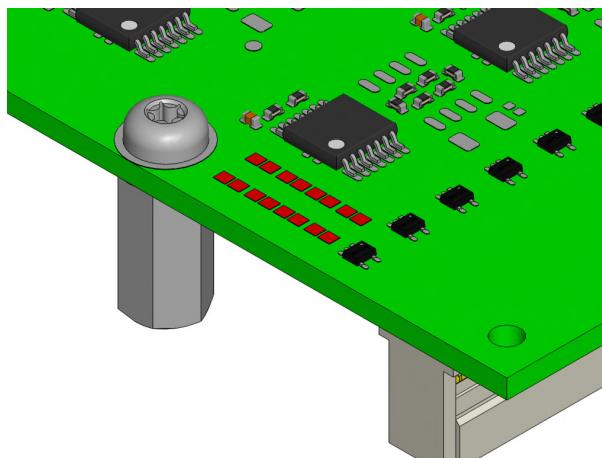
Optional GND connection solder bridges on PCB bottom side (pads marked in red)
